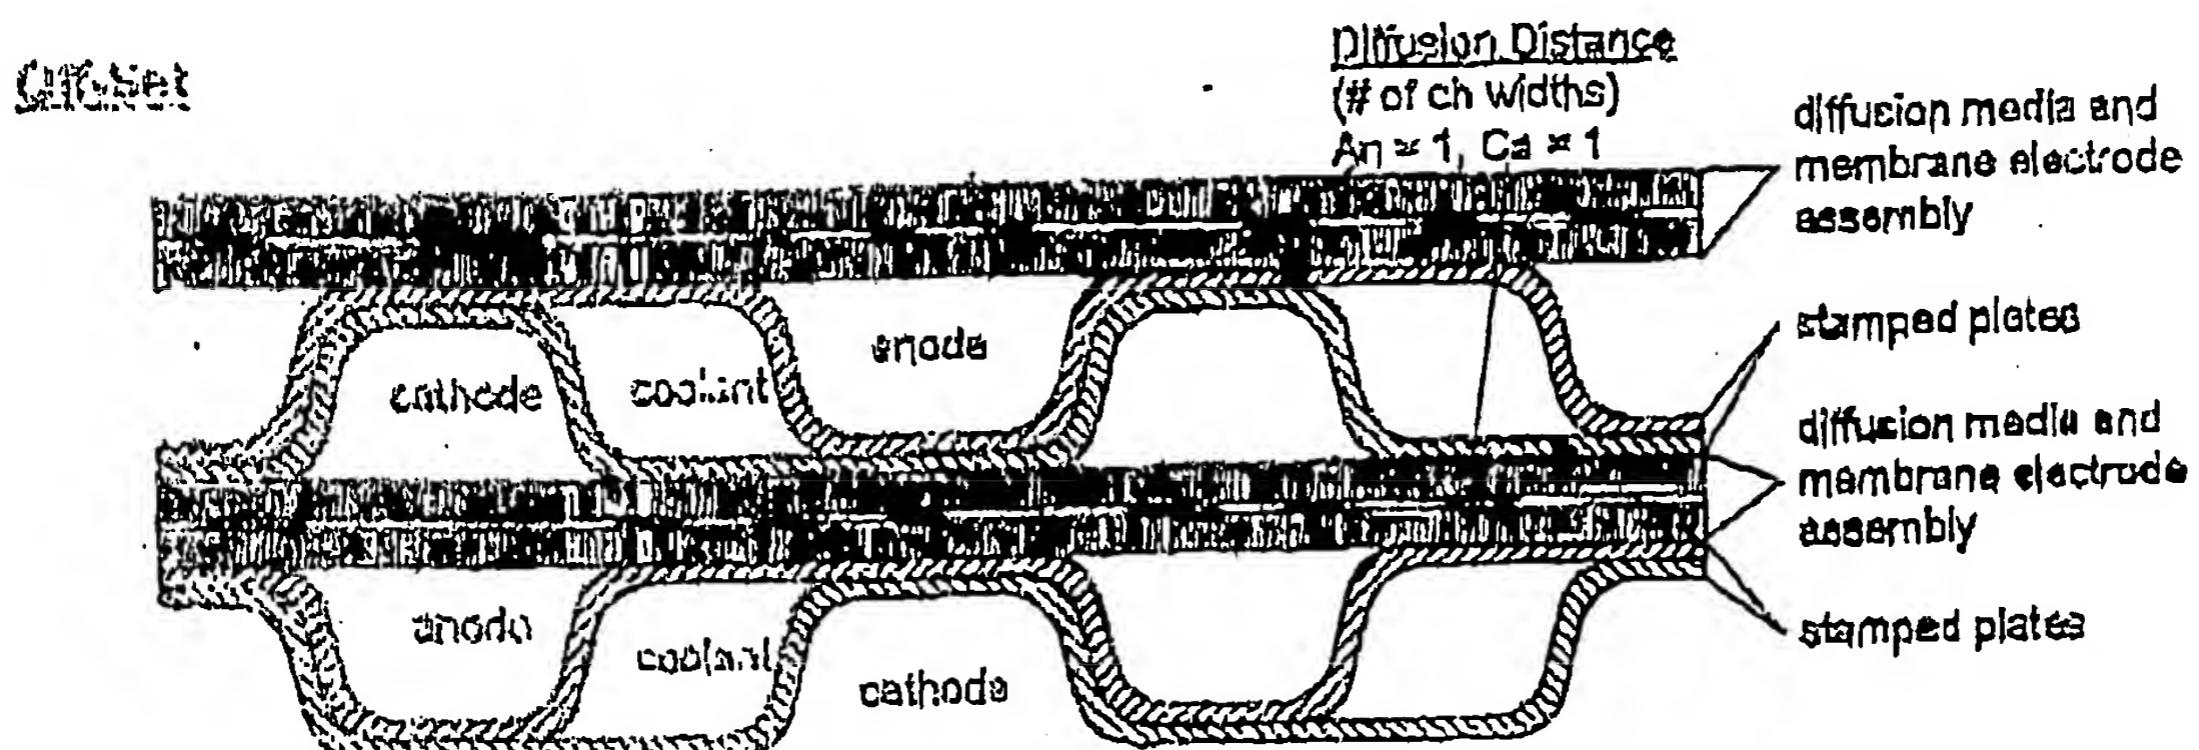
Nested Stamped Plate Cross-Section with Off-Set Platens
